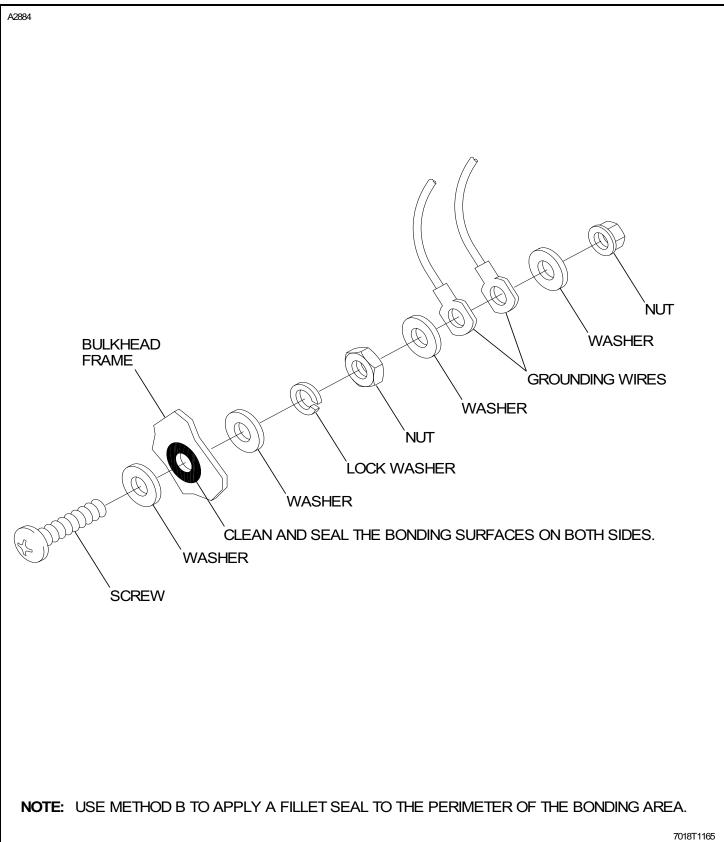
Sheet 1 : Electrical Bonding - Typical Permanent Ground Stud Installation
